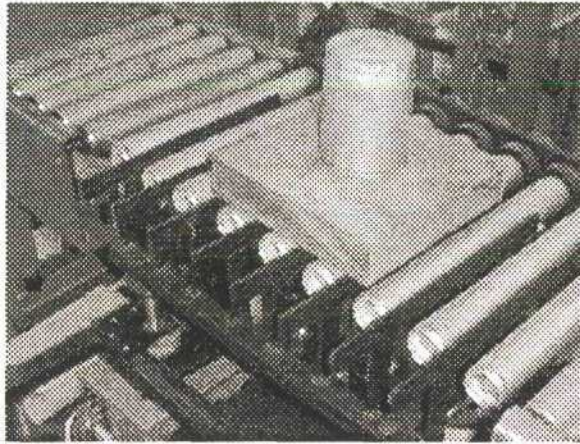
The AGV performing a docking procedure with the CIM cell to deliver a workpiece for assembly.
